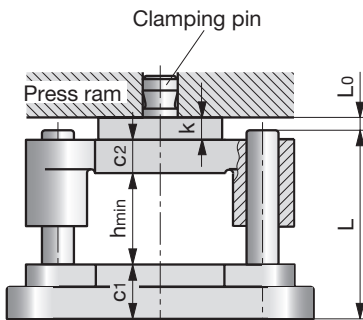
Minimum distance  $h_{min}$ . between the working surfaces when using clamping pin with head plate according to DIN ISO 10242-2.
